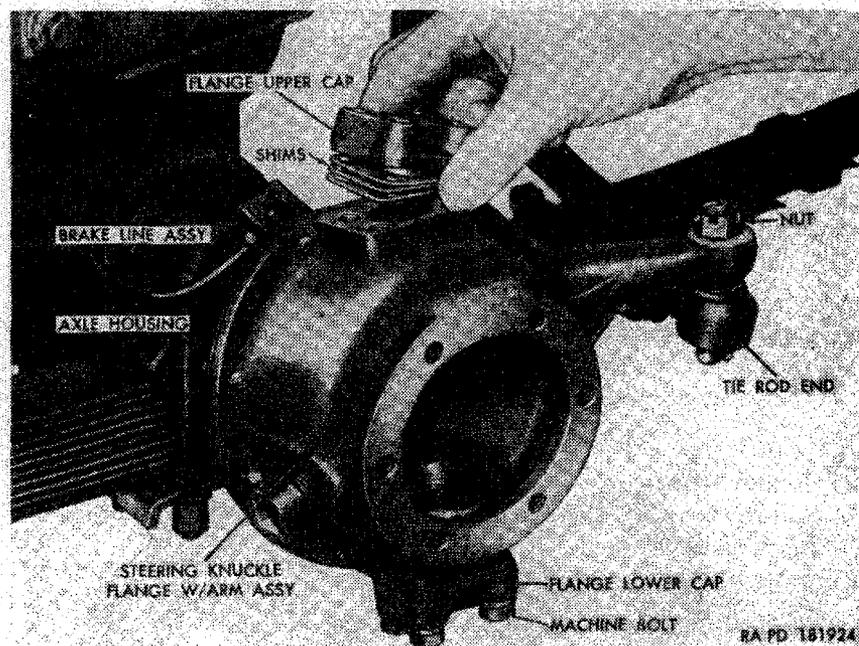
Removing flange upper cap and shims from right steering knuckle flange.
